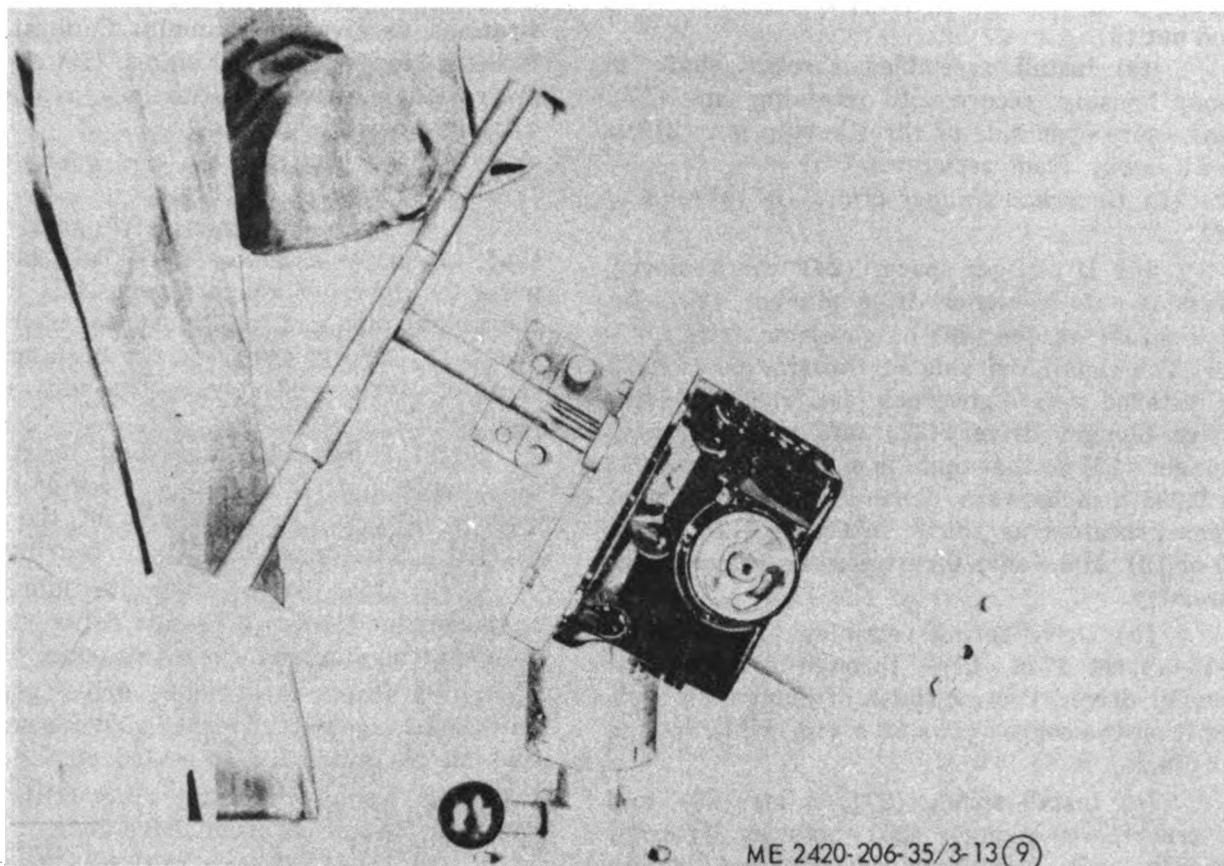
Reaming front drive shaft bushing (sheet 9 of 12).
